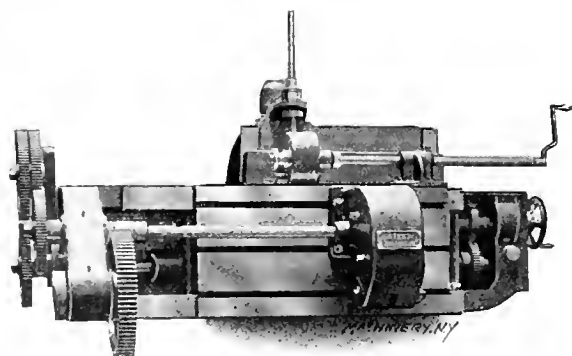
The Atlas Machine as arranged for Cutting Internal Gears; compare with Fig. 34.
